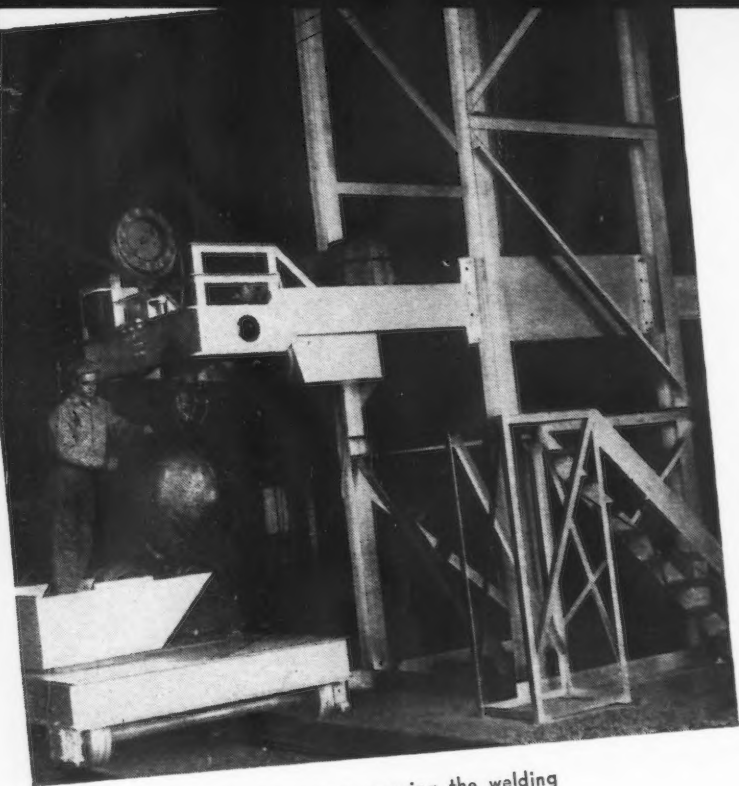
Use of this gantry carrying the welding unit, and a carriage providing longitudinal or rotary movement of the work, has increased production six times over former manual welding methods.
